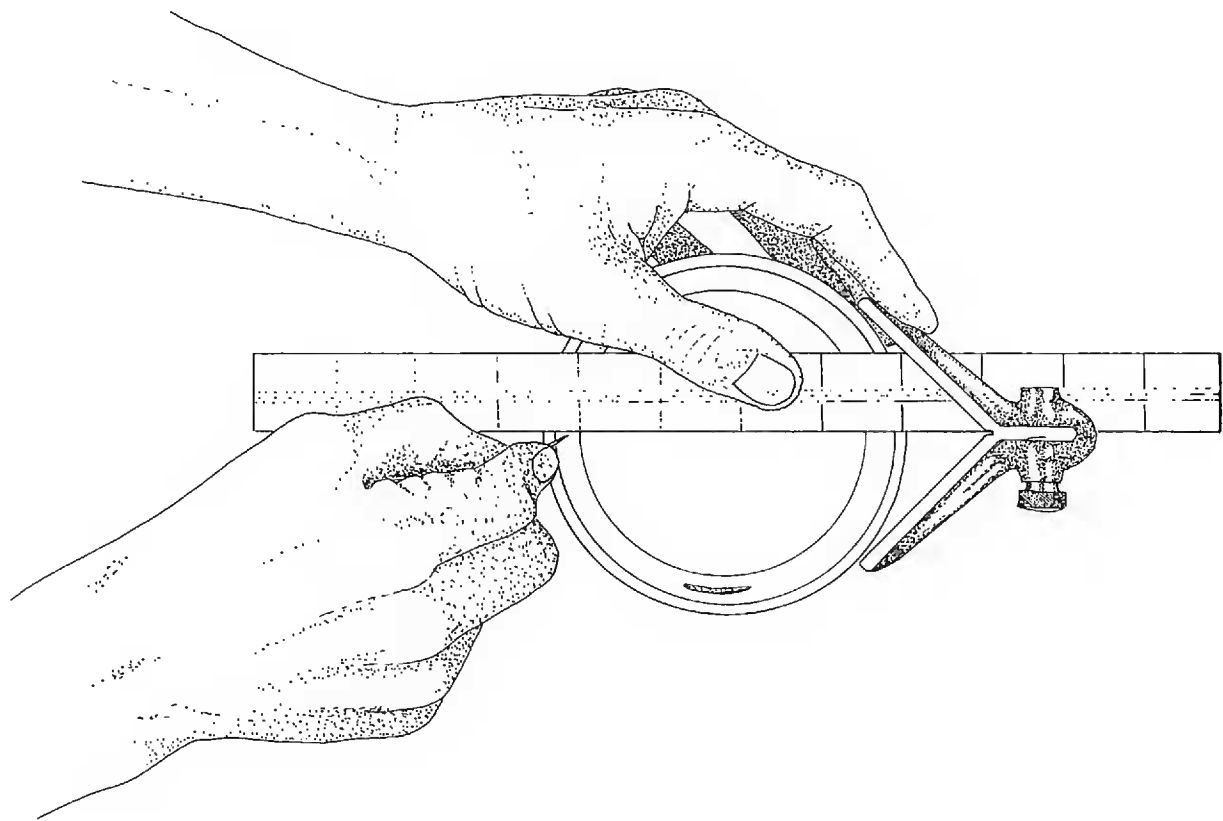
A center finding head is used to locate positions for drilling $\frac{1}{16}$ in. holes.
